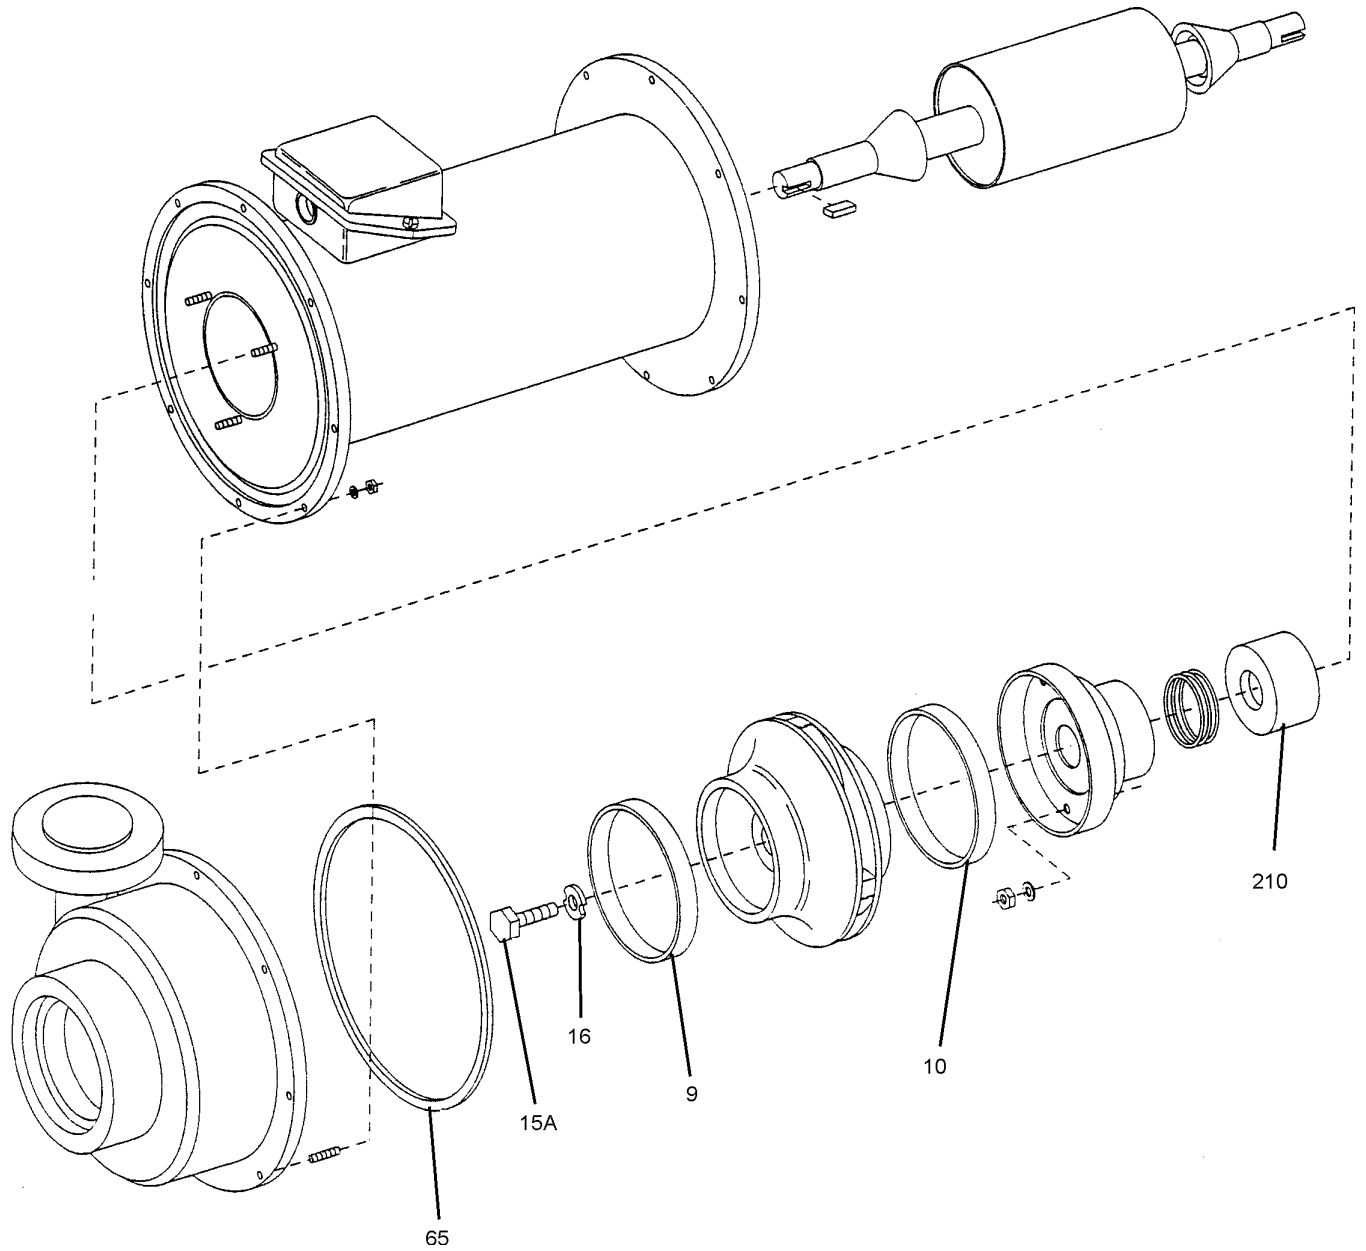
PUMP, SINGLE-ENDED EXPLODED VIEW
